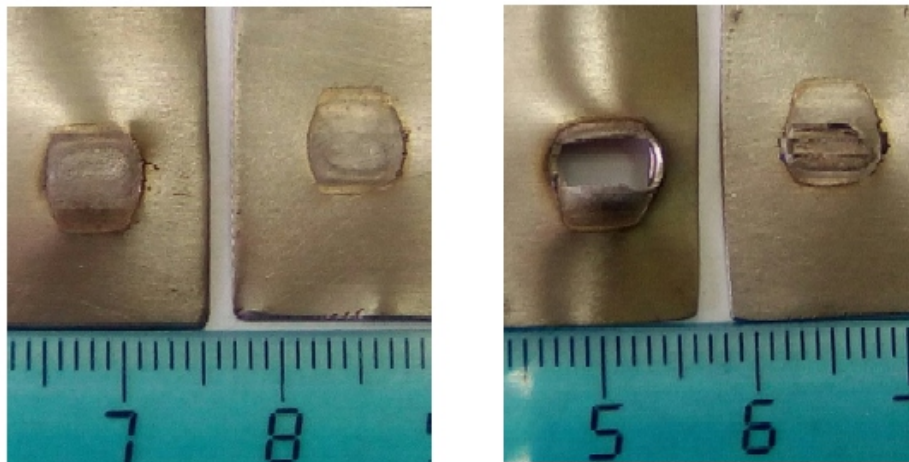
Samples of titanium weld joints processed by USW for 1 s under the static load of 6 (a) and 7 (b) kN after lap shear tests. The left figure indicates the interface failure and the right weld nugget pullout mode of failure.
